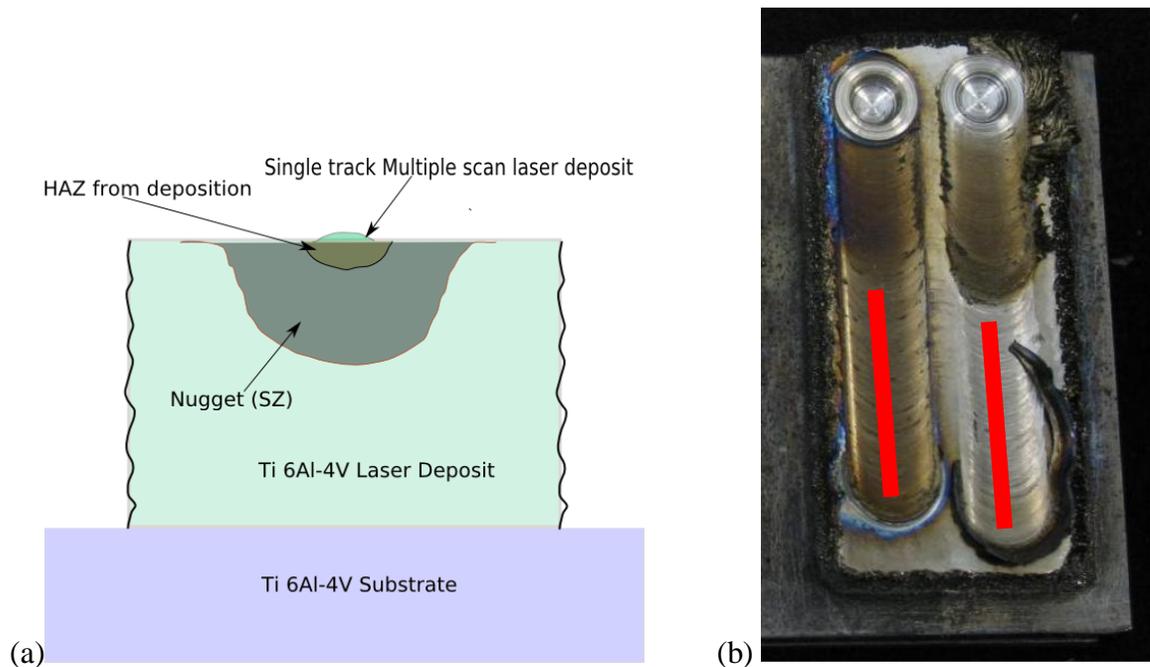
(a) Laser HAZ inside the stir nugget, (b) Track placement over the stir surfaces
